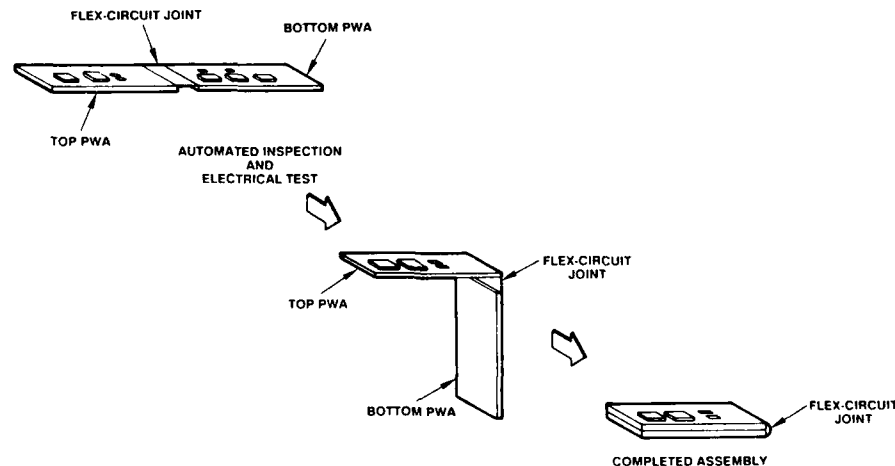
Double-Sided Assembly Using Flex-Circuit Joint Concept
